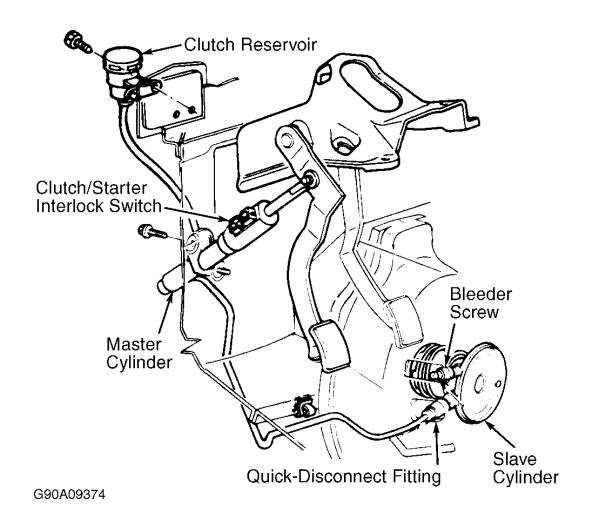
Removing Clutch/Starter Interlock Switch (B2300, B2500, B3000 & B4000) Courtesy of FORD MOTOR CO.
